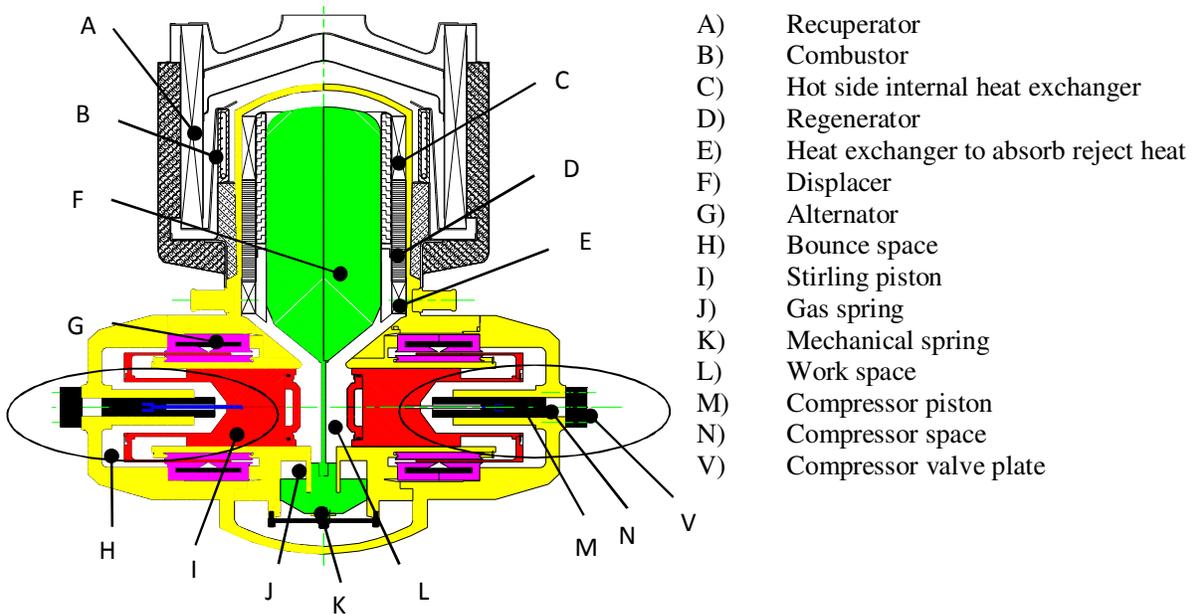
Principle sketch of Stirling engine driven compressor in which the compressor part is indicated by the ovals.
